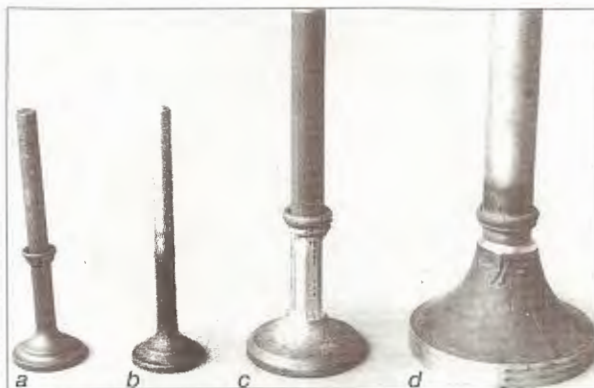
Welded valves: *a* — «Tavria» car engine; *b* — same with removed flash; *c* — pipe-laying machine engine; *d* — locomotive engine.
